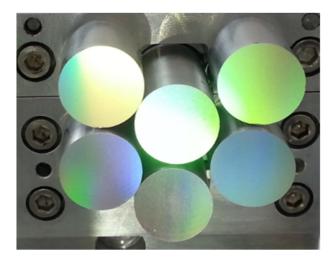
Example of curved gratings manufactured at Durham University using diamond machining.
